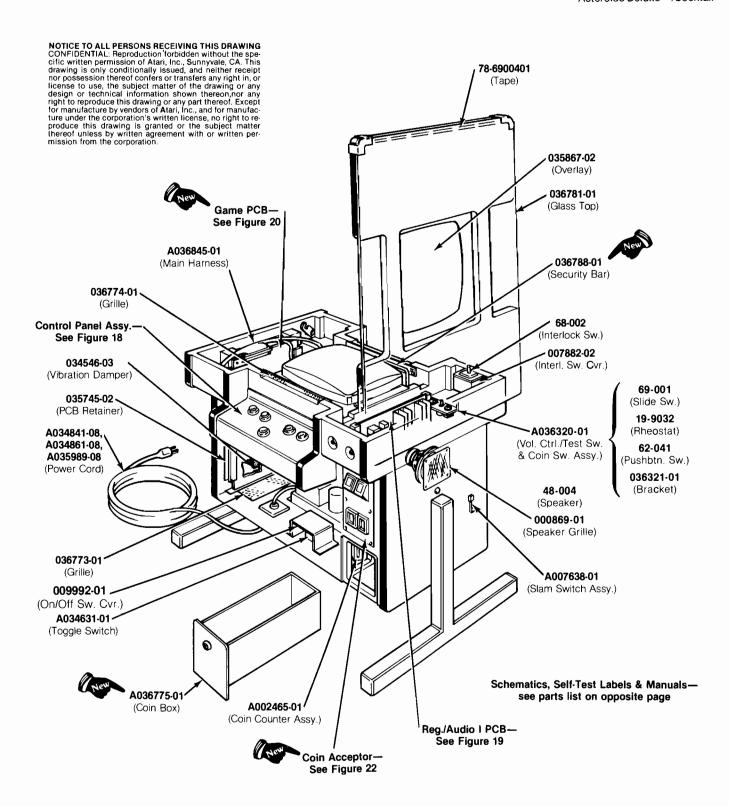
Cabinet-Mounted Assemblies A036780-01 A
